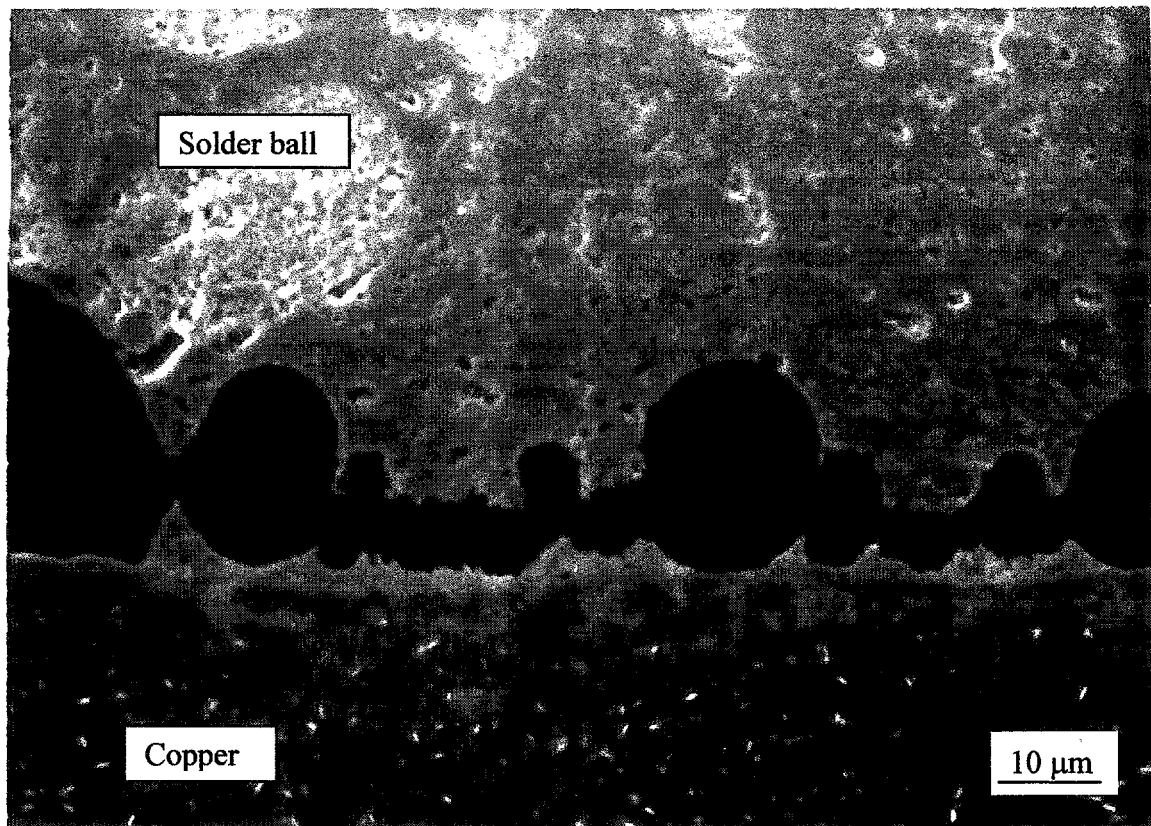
SEM micrograph of cross-sectioned BGA solder joint after shear test, showing a crack connecting the pores close to the interface.
